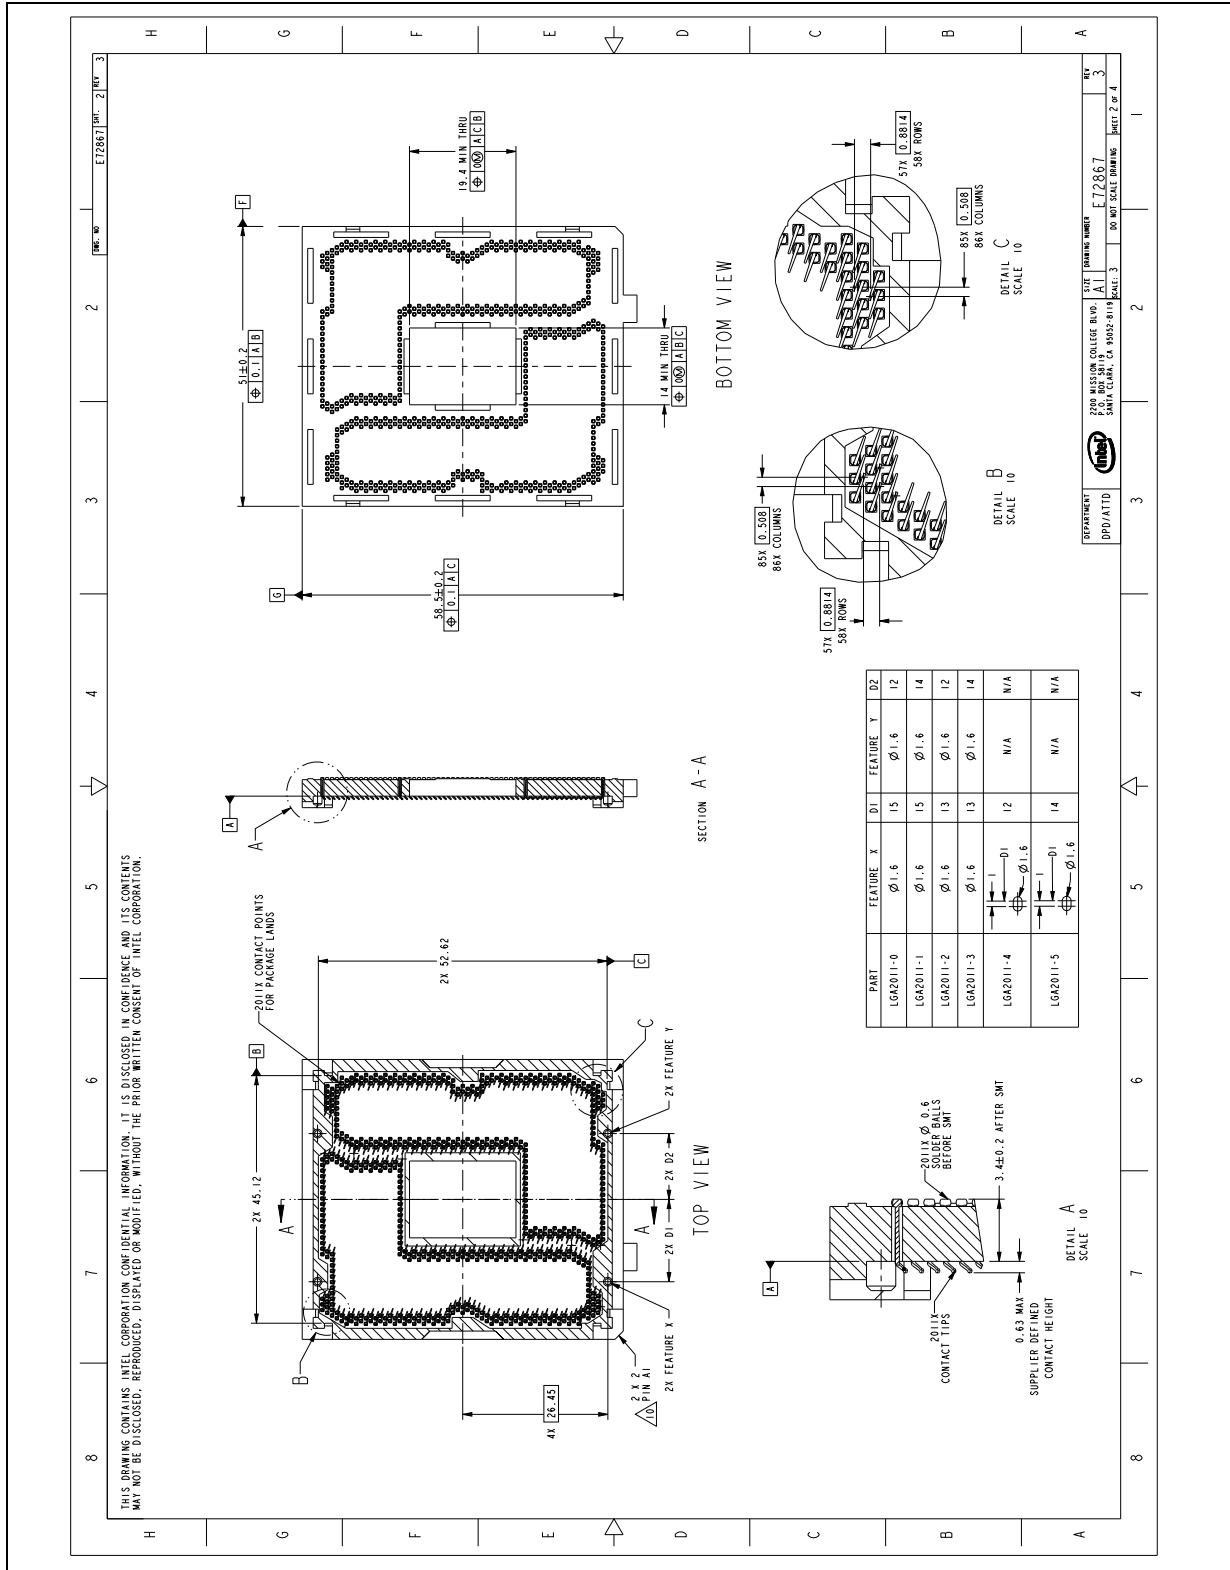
Socket Mechanical Drawing (Sheet 3 of 4)
